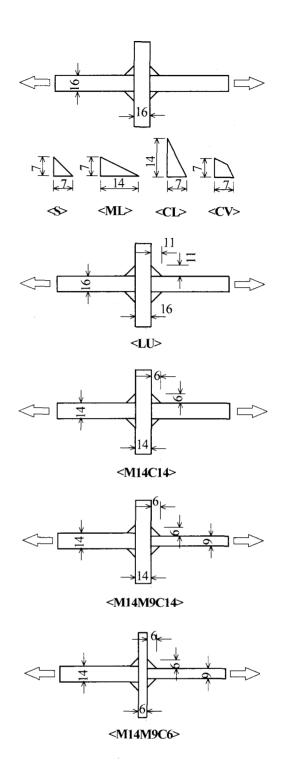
Test specimens of load-carrying fillet welded cruciform joints (dimensions in millimeter)
